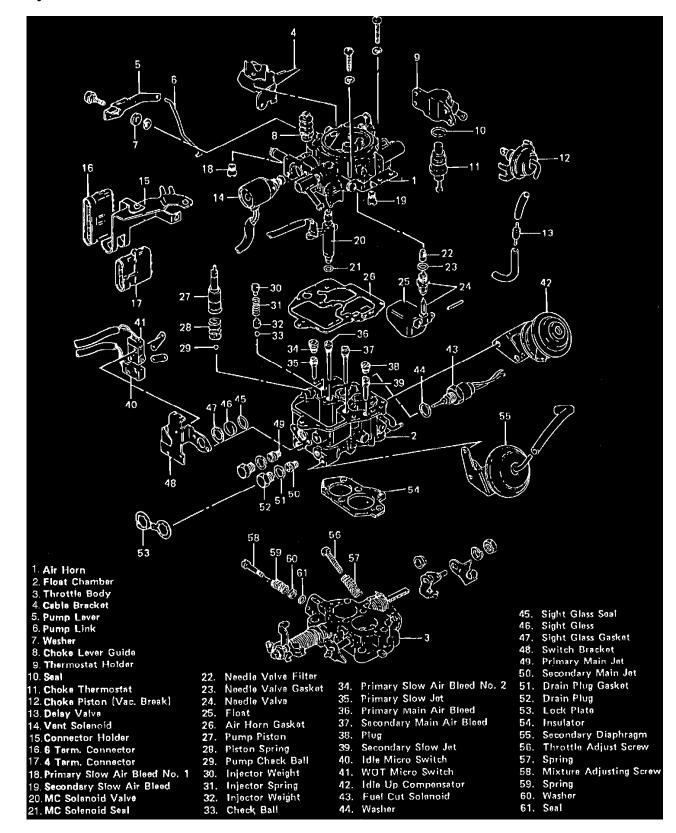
Typical Exploded View Of Hitachi MR08 Carburetor
